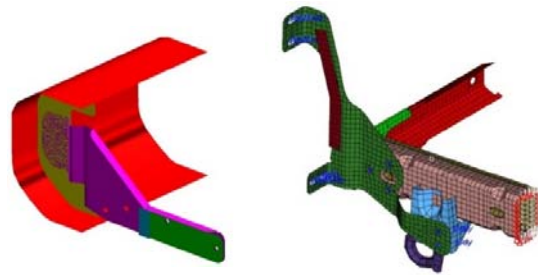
(b): Folded plate mount configurations and their mounting locations
